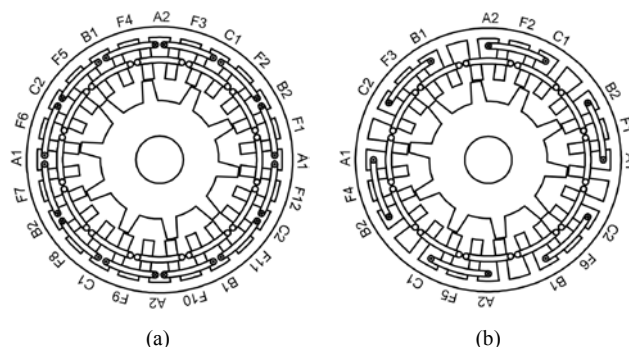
12/10 stator-/rotor- pole WFSF machines with single and double-layer DC windings. (a) Double-layer (Machine A). (b) Single layer (Machine B).
